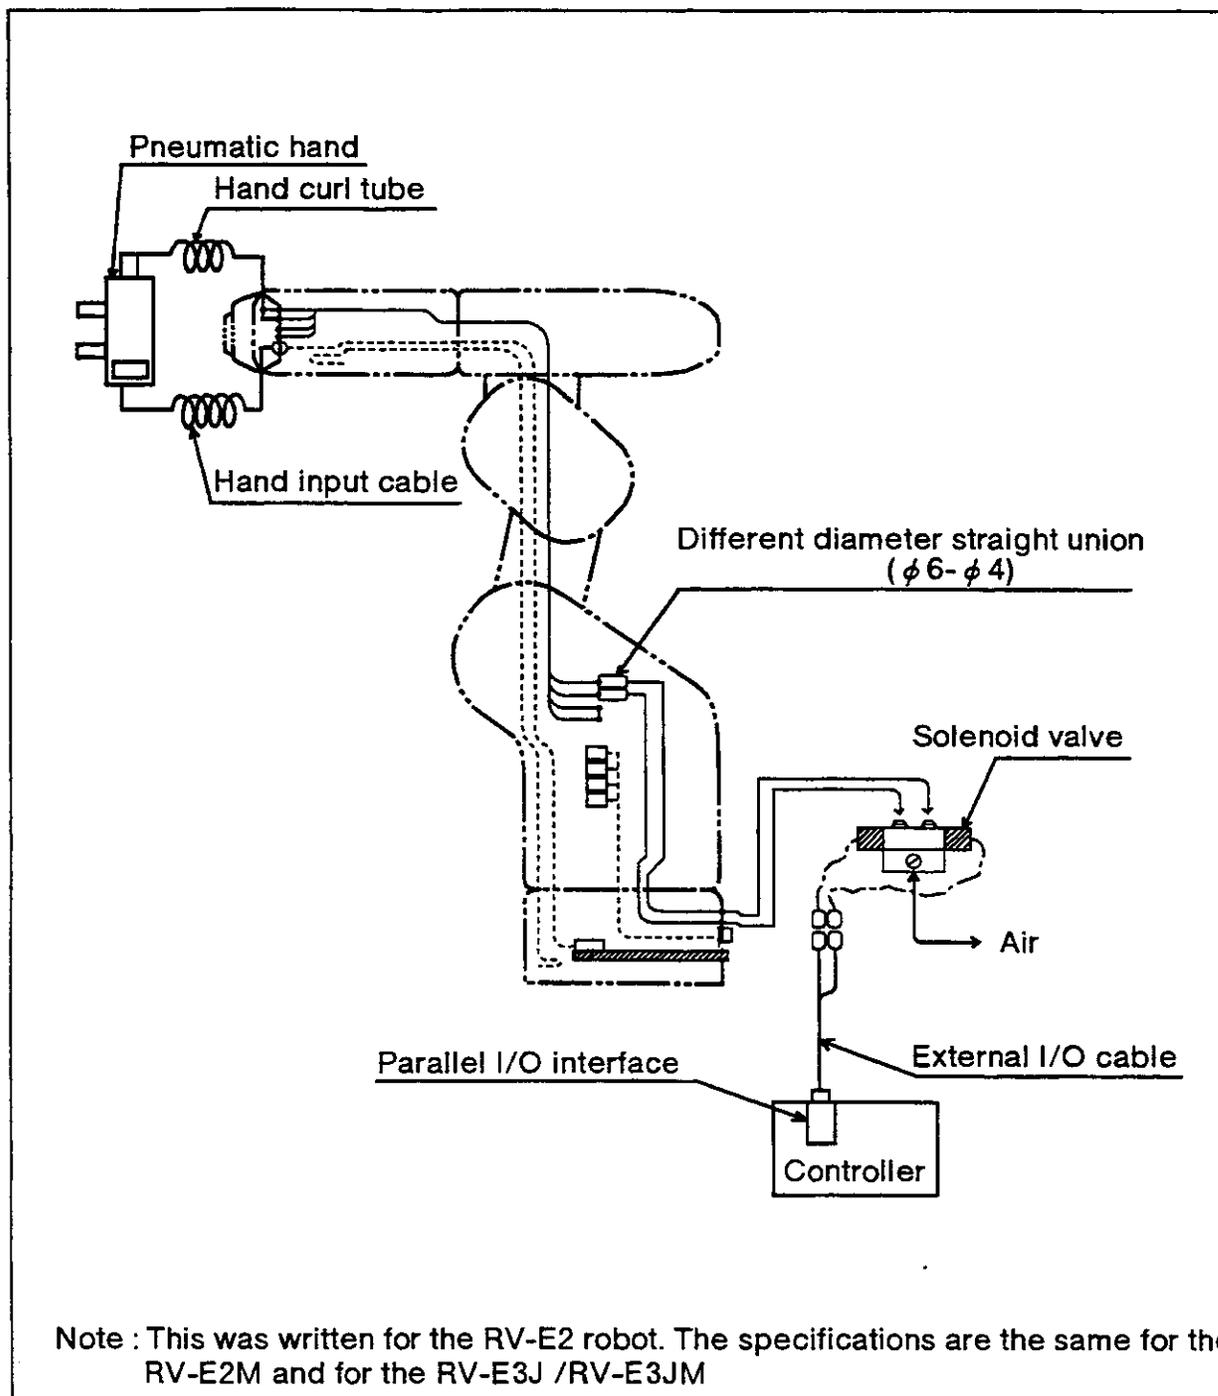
Method of installing a solenoid valve externally (Using parallel I/O to control)
